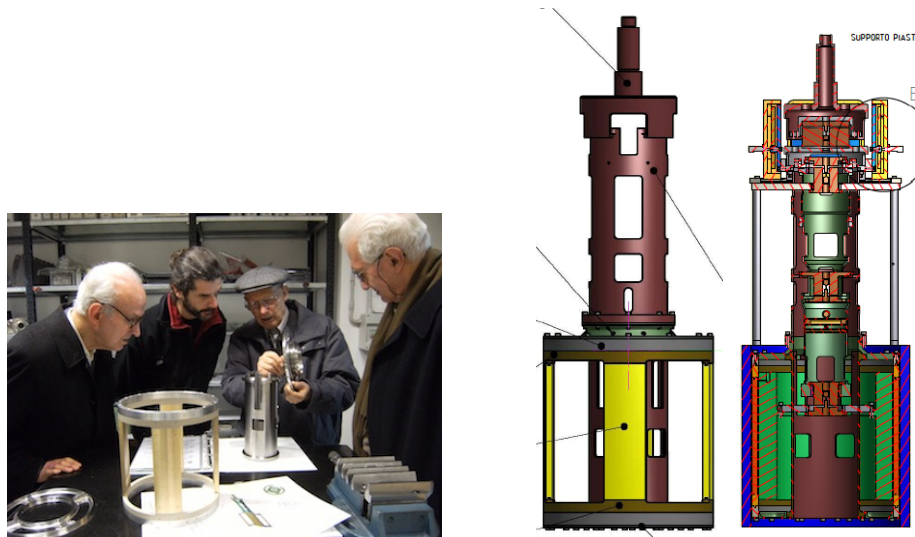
The capacitance cage currently used for the read-out of the GGG prototype (2 cap bridges in 2 perpendicular directions). *Left*: the cage during manufacture showing 4 brass plates. *Right*: engineering drawings showing the cap cage rigidly mounted on the shaft and the assembled with the test cylinders and the coupling arm of the GGG prototype balance.
